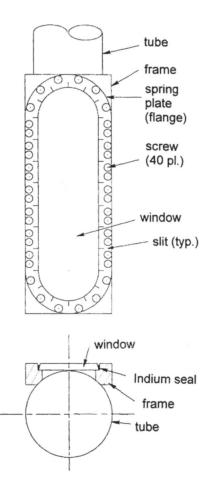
Plan and end views of a cryogenic window assembly with pressure-loaded indium seal. (Adapted from Haycock et al. 3)
